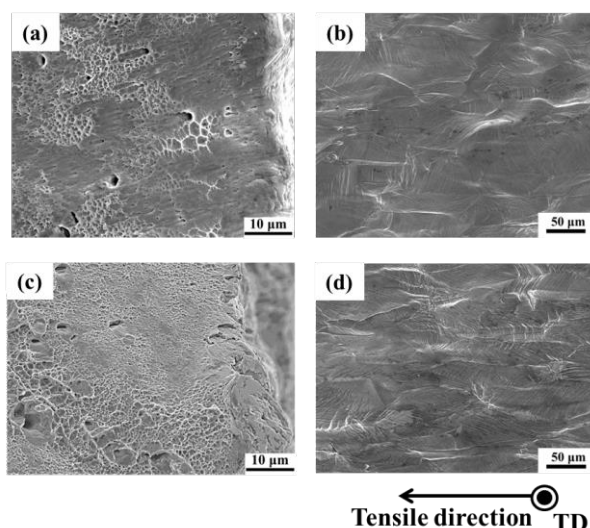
Fractographs of the edge parts of fractured surfaces and SEM images of the side surfaces of fractured specimens; (a and b) 0Al and (c and d) 2Al specimens.
